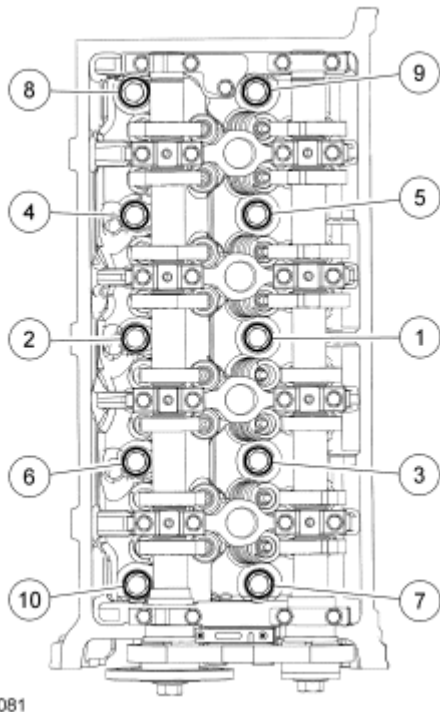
Tightening New Cylinder Head Bolts In Sequence
